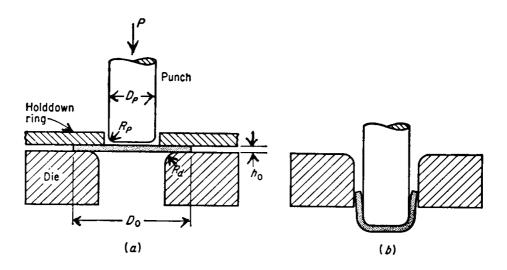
Deep-drawing of a cylindrical cup; (a) before bending, (b) after drawing.
